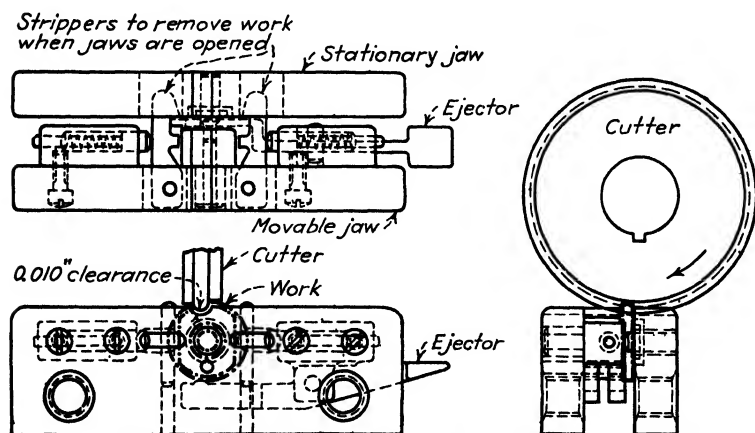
This vise-jaw milling fixture has been found very efficient.
